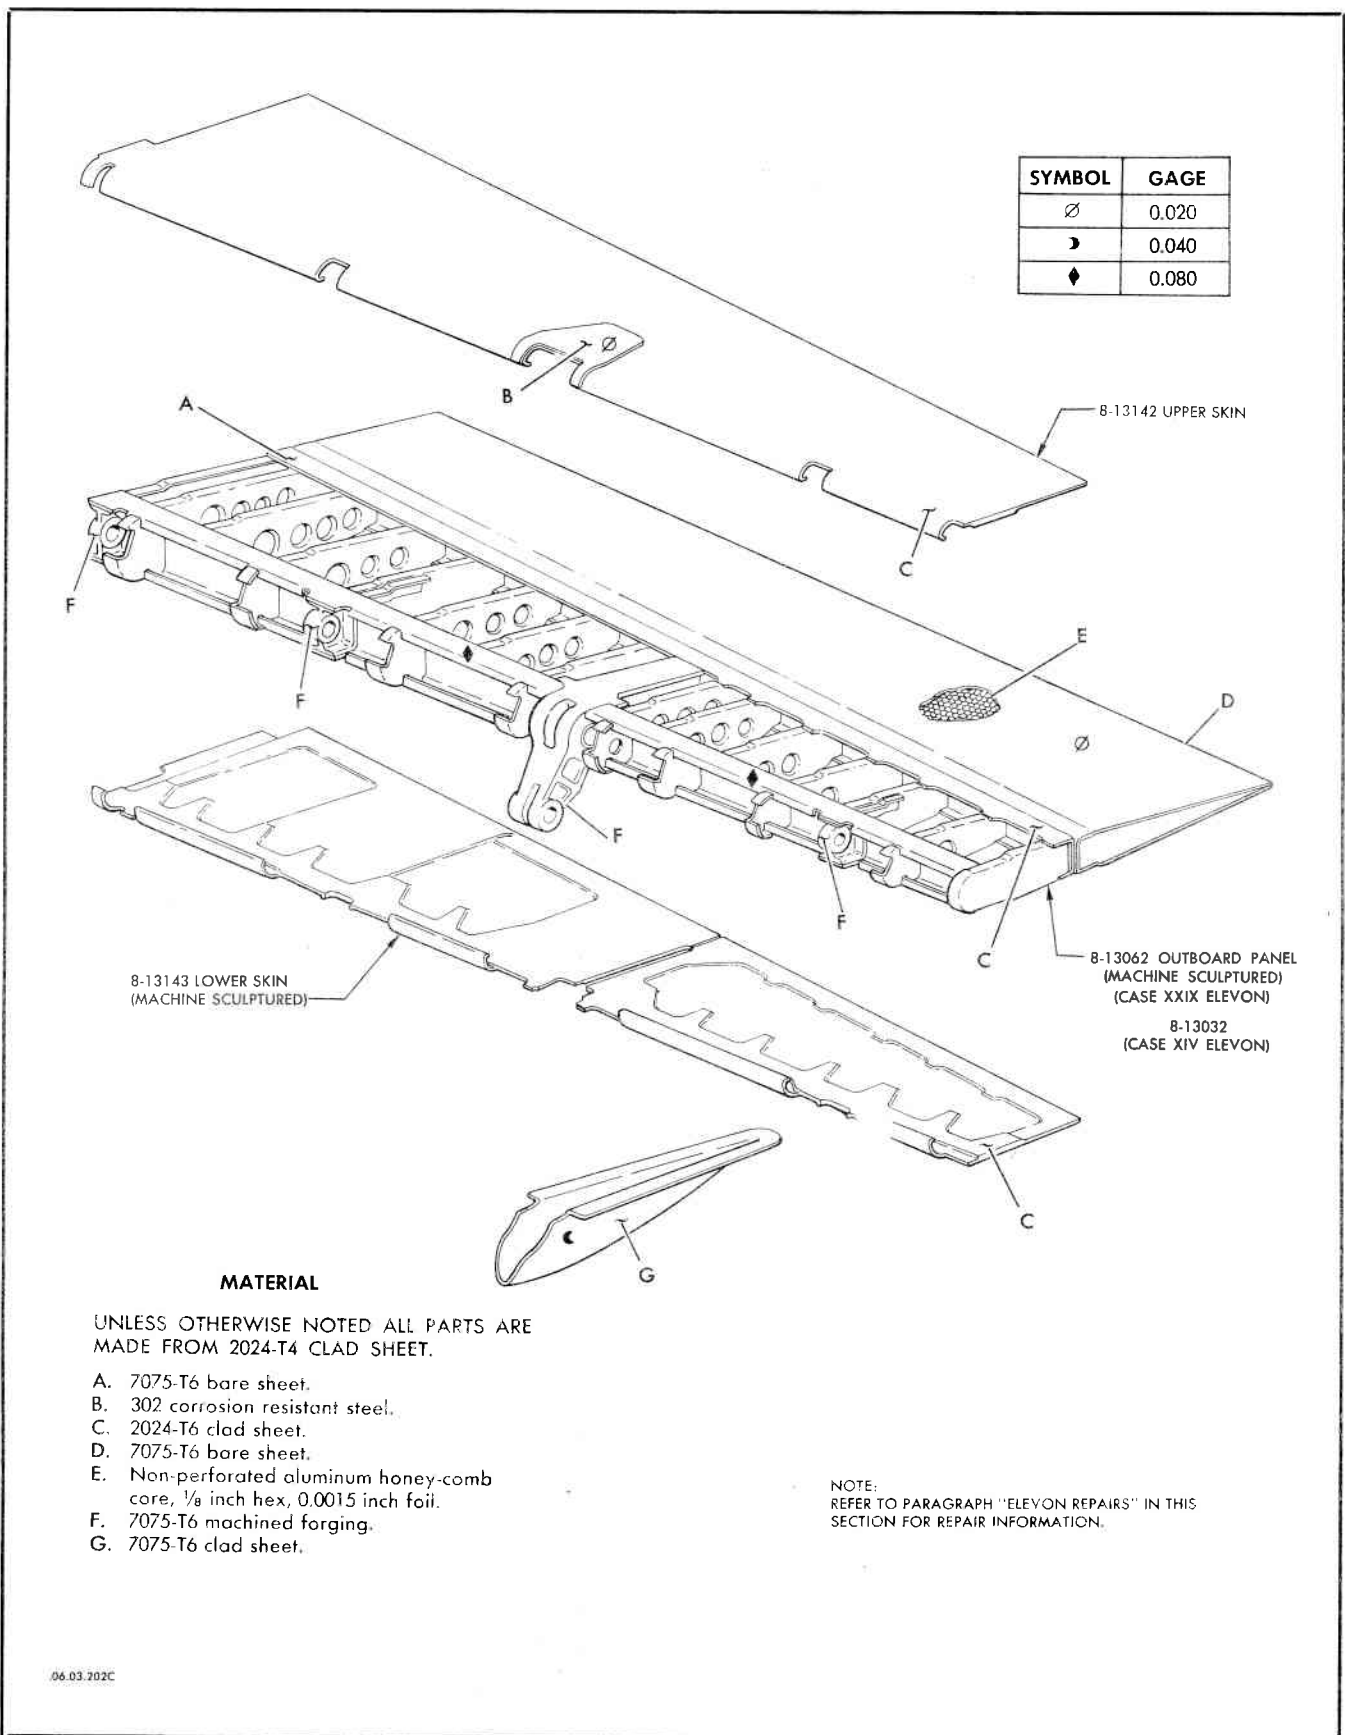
Elevon Structure and Plating — Outboard Panel
